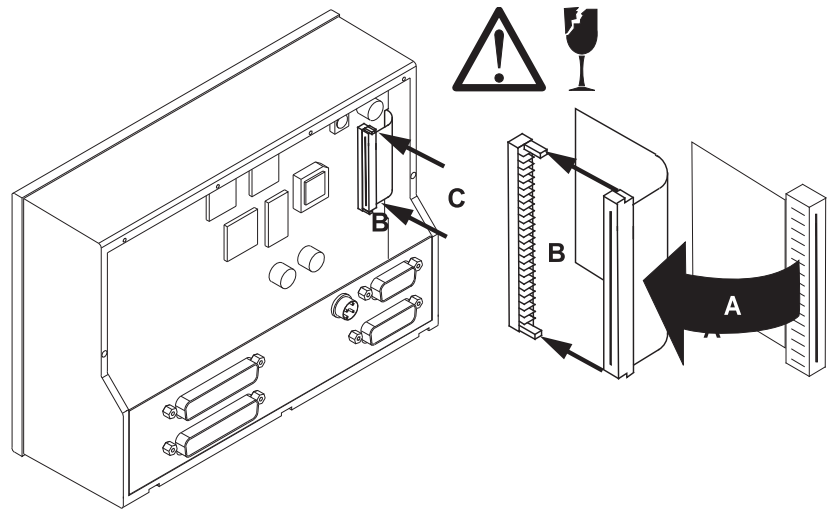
Fastening the connecting flat cable to the main pcb
